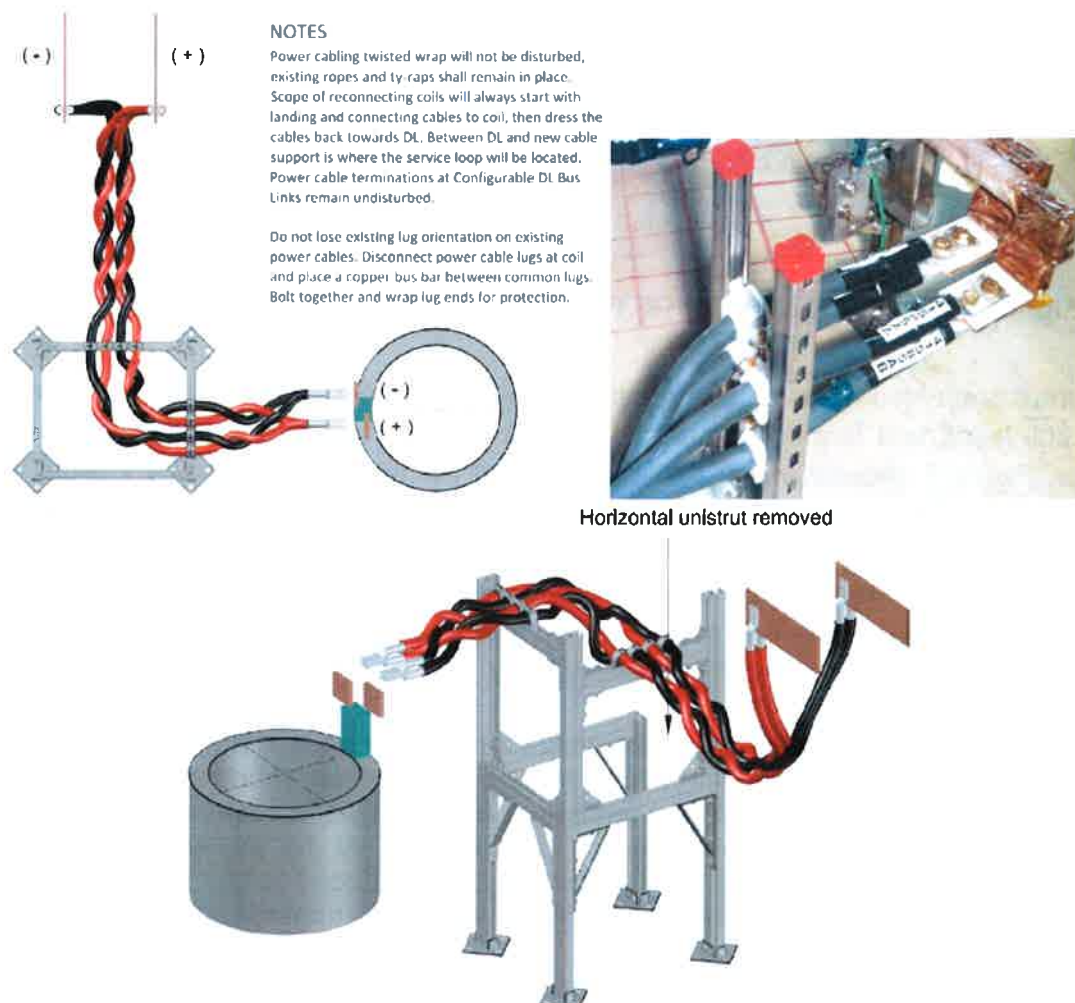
Cable support + terminal connection to 750 MCM power cables (Corl)
